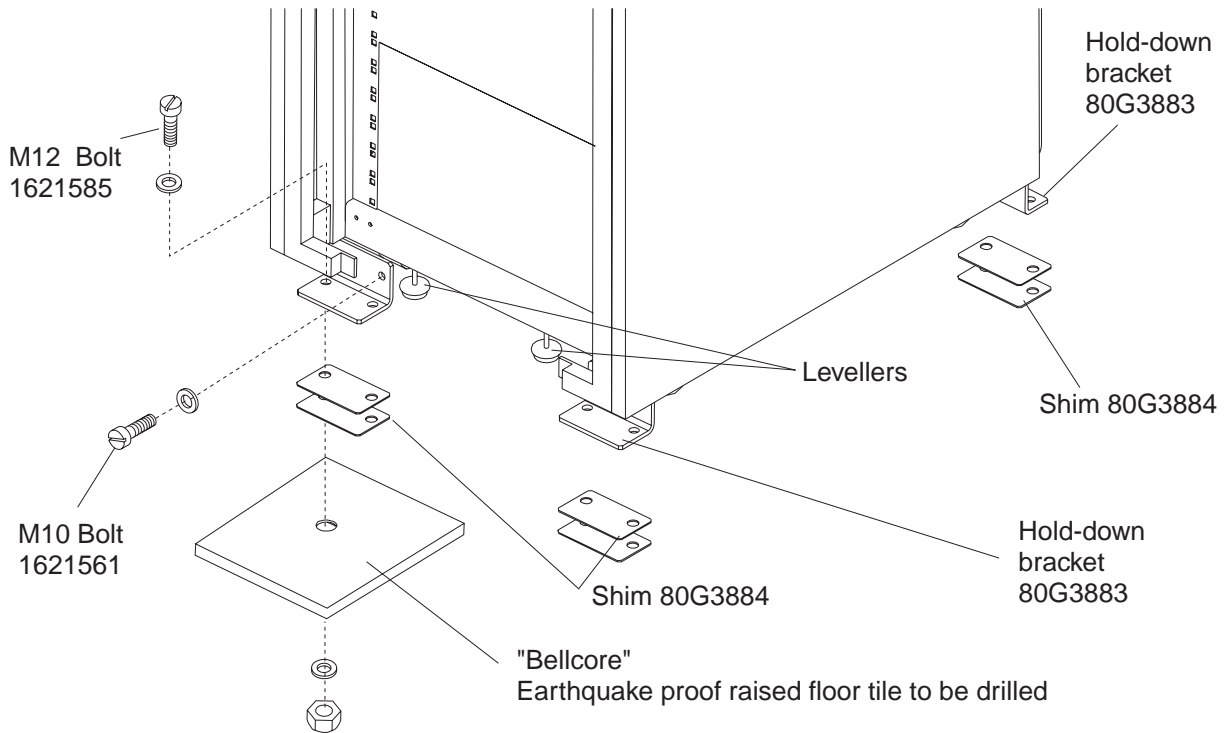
Installing a Machine on a Specific Earthquake Proof Raised Floor (Rear Side)
